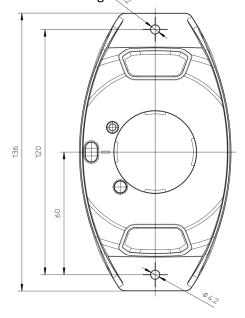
ROOF MOUNT INSTALLATION STEP 2 (MEASURE AND MARK THE INSTALLATION HOLES)
